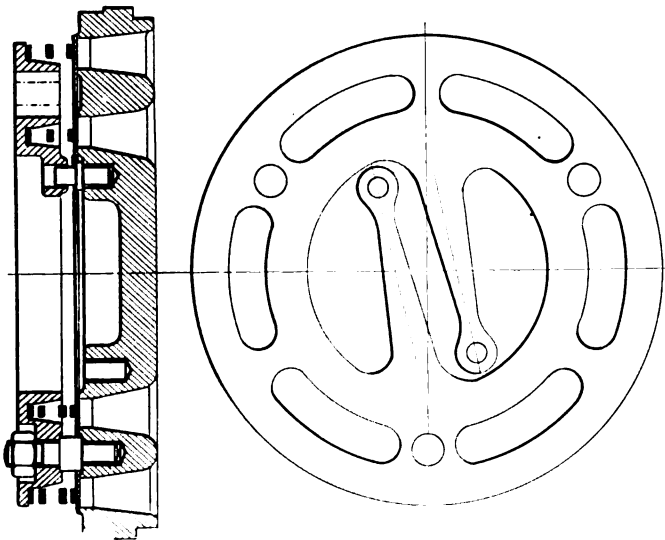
MULTI-PORTED PLATE VALVE (BORSIG)
